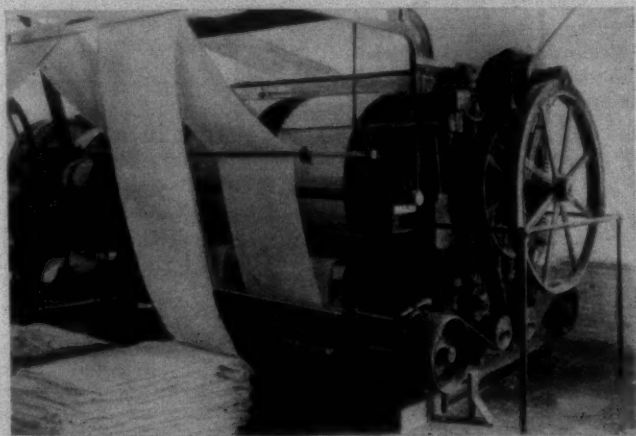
A Ball Bearing Napper Machine, Motor Driven.
